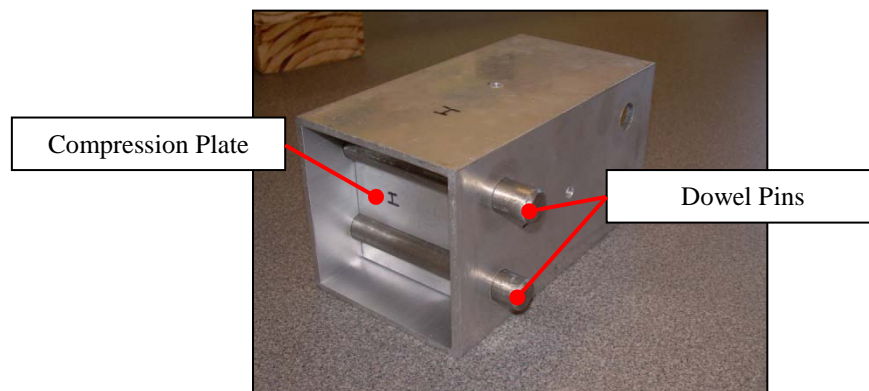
Mold with 1 compression plate (rear plate removed to contrast with installed plate).
